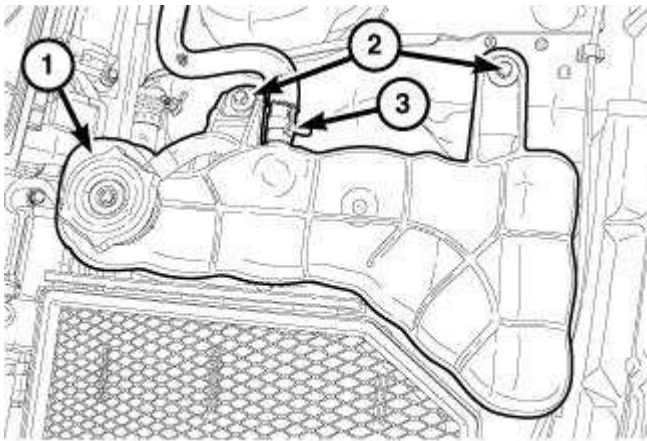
Coolant Recovery Container Pressure Cap, Tube & Screws
